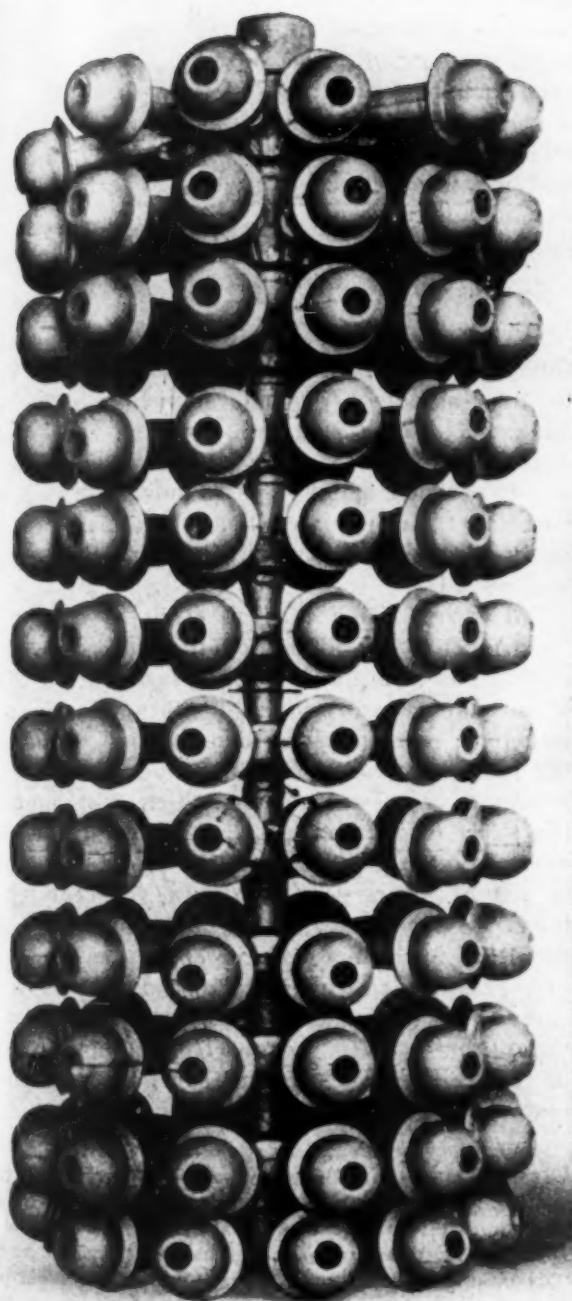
Nest of Spring Bearings for Tractor Tread Carriers; Casting Is Done by Centrifuging
